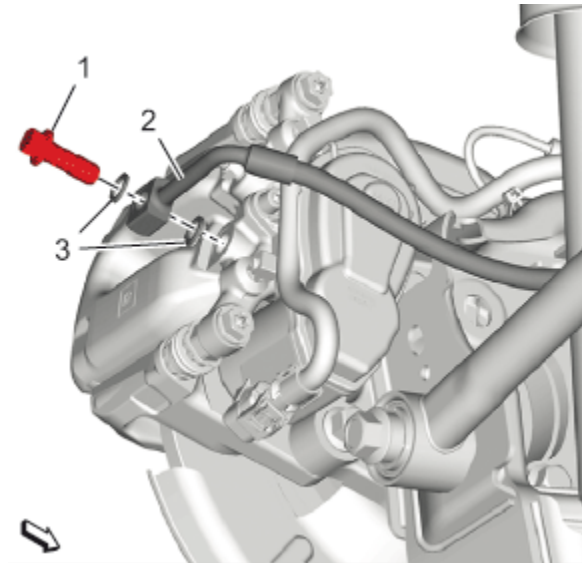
Brake Hose, Fitting Bolt And Sealing Washers
